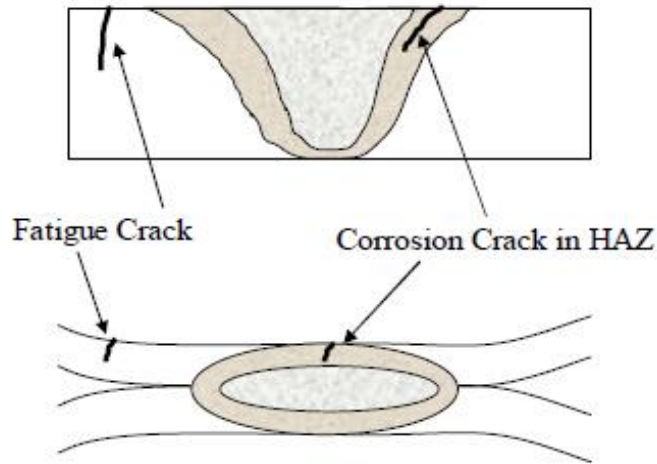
Schematic showing locations of fatigue and corrosion crack in and near the welds
